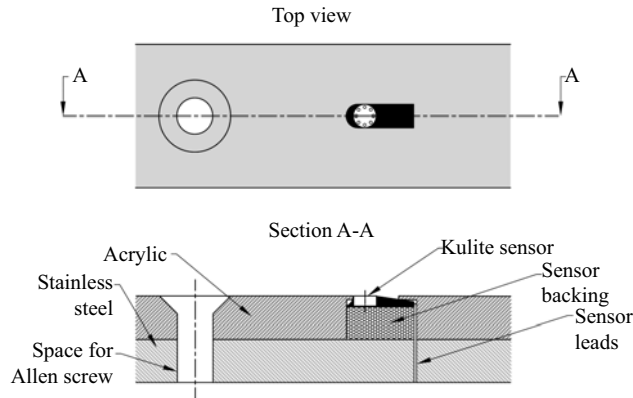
A 2-D drawing showing the top view and cross-sectional view of the composite plate that accommodates the ultra-thin miniature pressure transducers.
